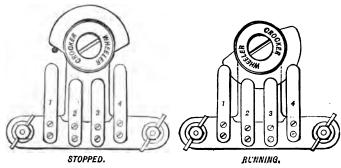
Crocker-Wheeler Type of Motor Switch.
